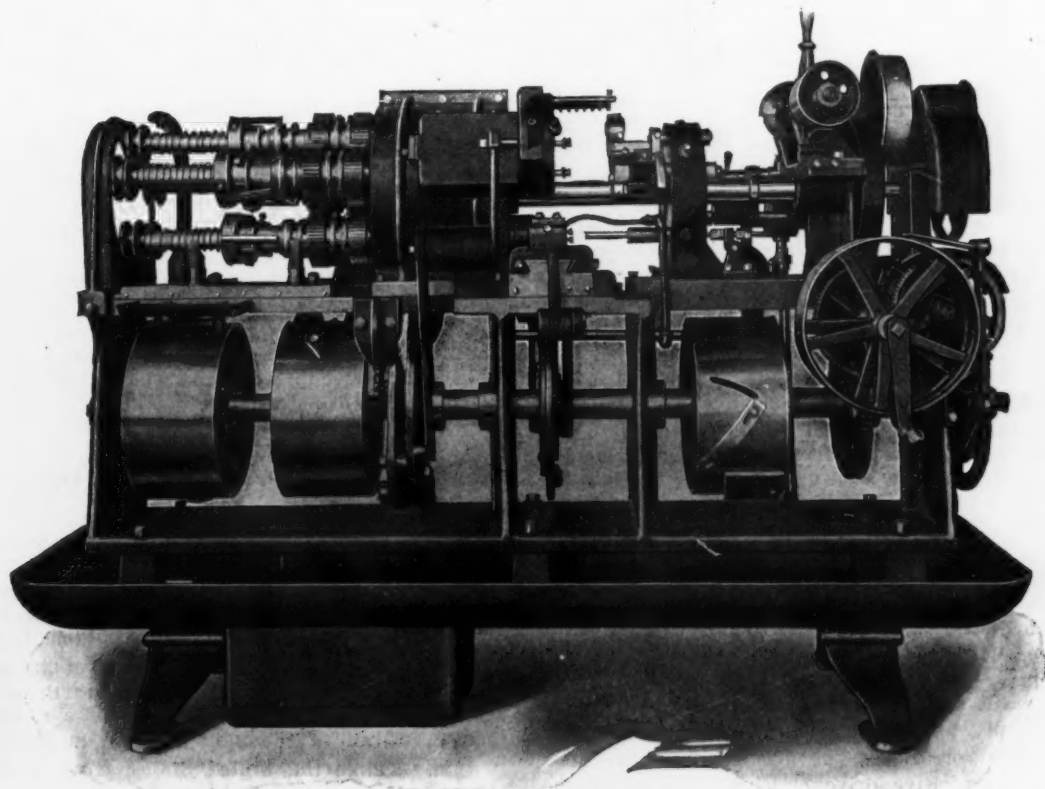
The Improved Universal Multiple Spindle Automatic Screw Machine, Built by the Universal Machine Screw Company, Hartford, Conn.
